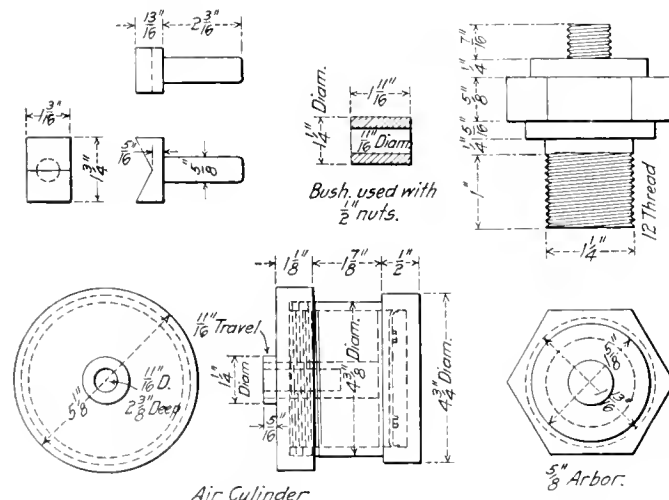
Air Cylinder for Nut Removing Device on Nut Facing Machine.
